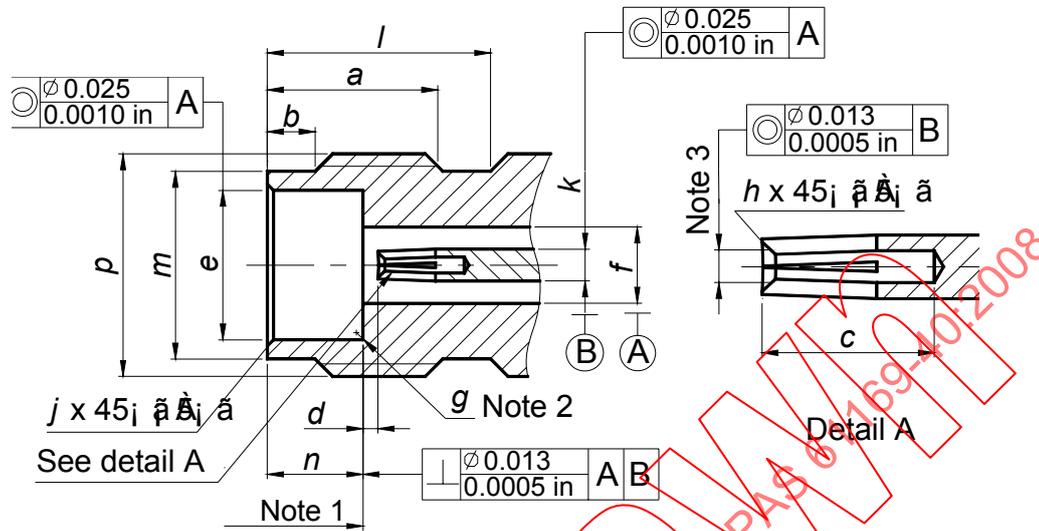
Connector with socket-centre contact (for dimensions see Table 5)
